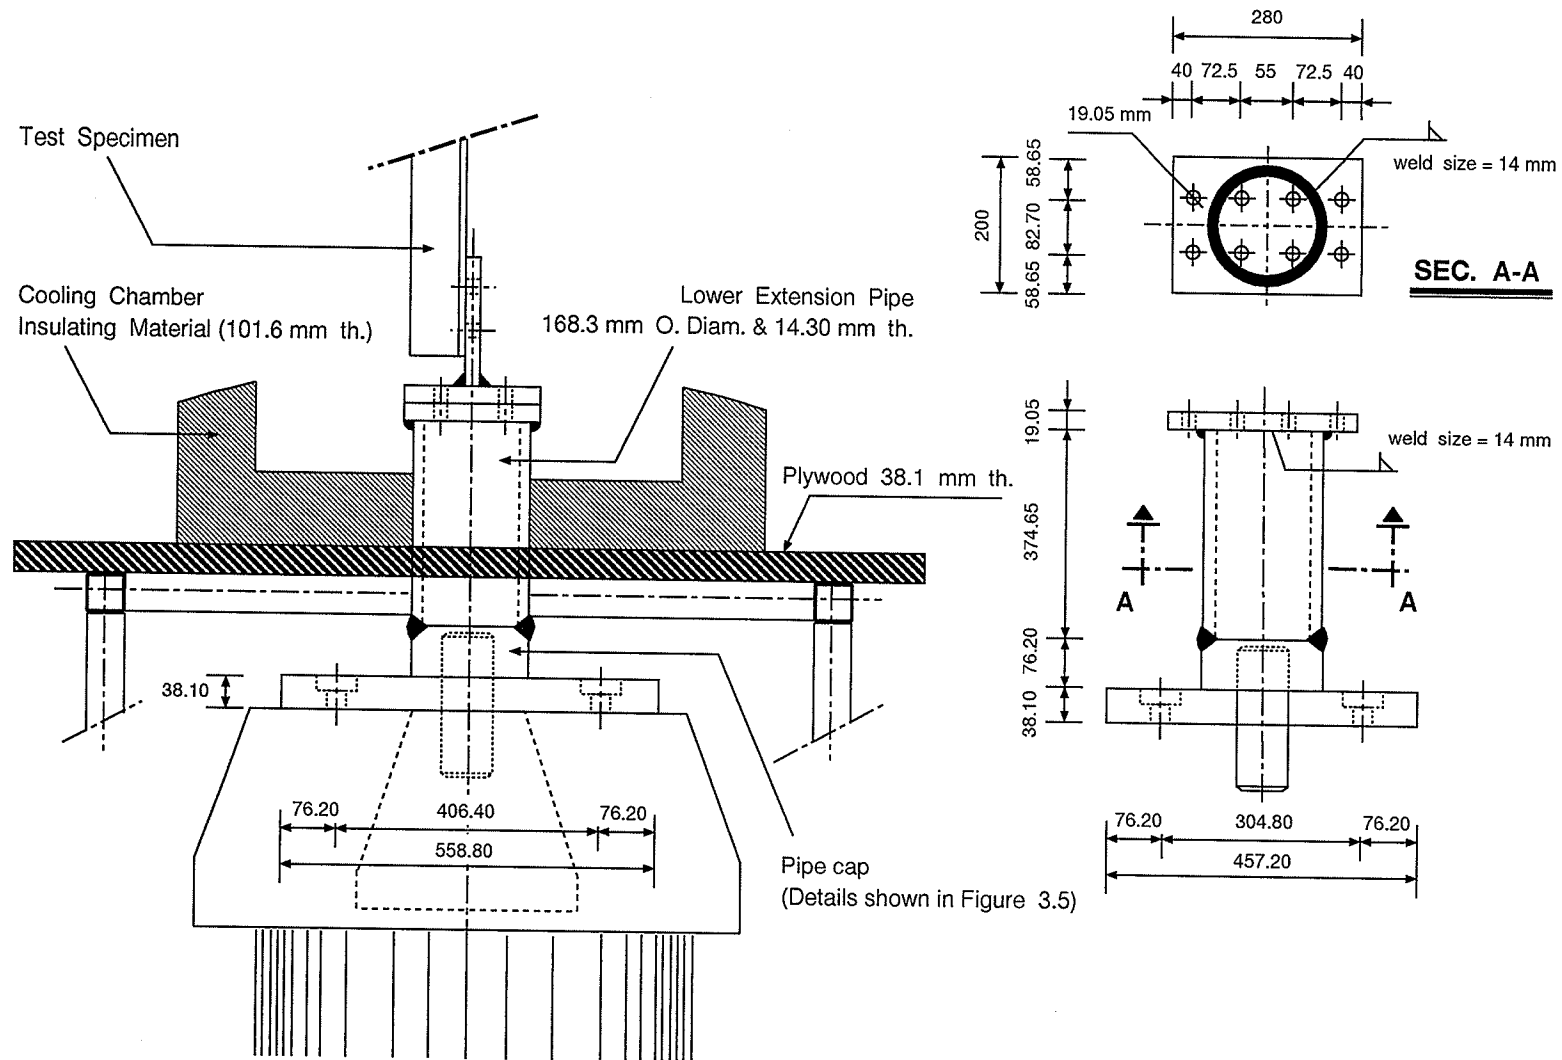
First Lower Grip System Used with Test Setup # 1.
